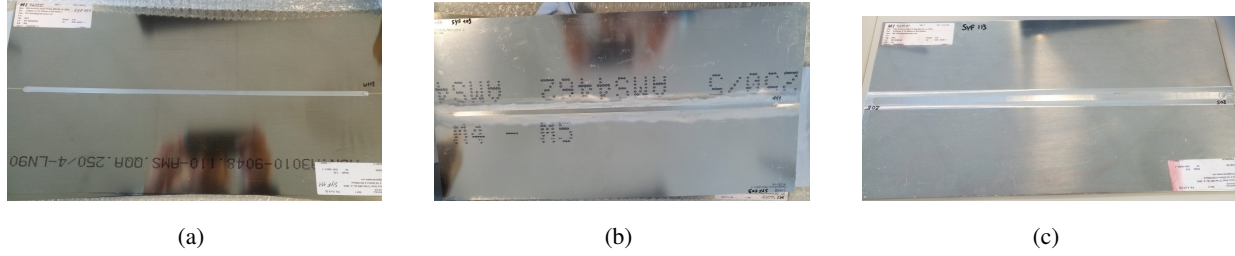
Welded sheets (250 mm x 500 mm) used for testing. (a) Bare 1.6 mm sheet. (b) Alclad 1.6 mm sheet with cladding removed from face (topside). (c) Alclad 3.2 mm sheet with cladding removed from face (topside).
